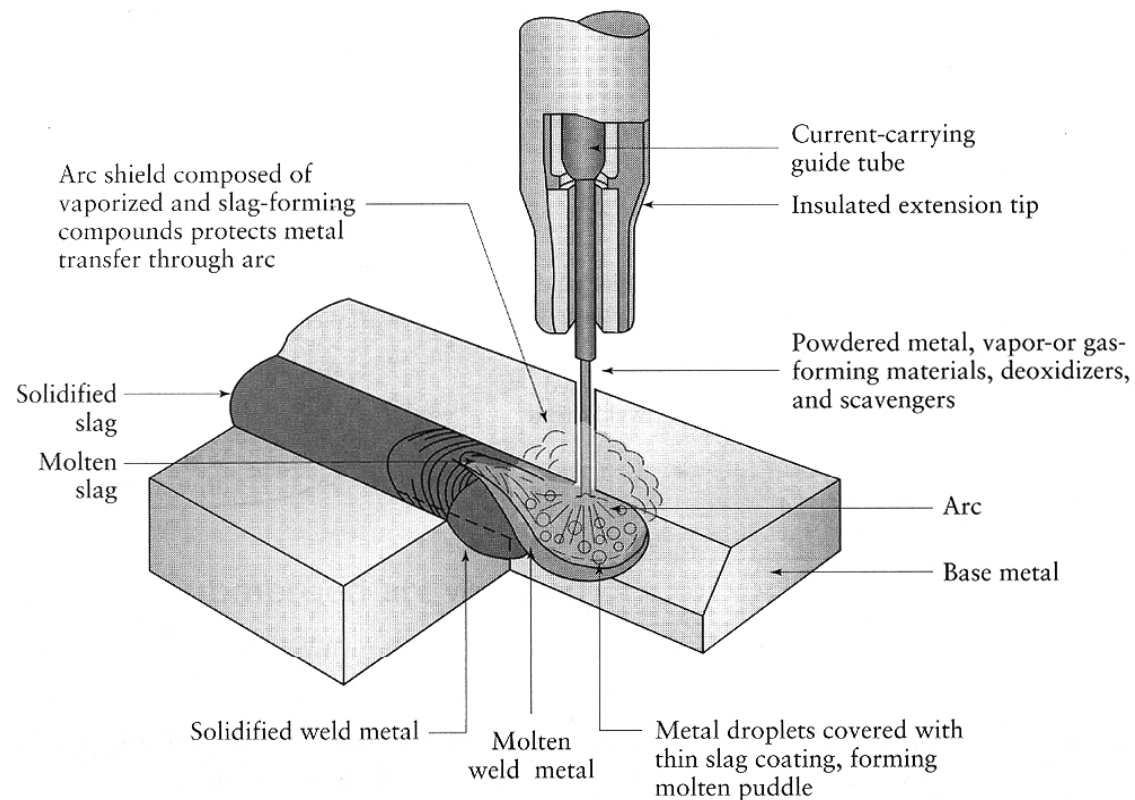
Schematic illustration of the flux-cored arc-welding process. This operation is similar to gas metal-arc welding, shown in Fig. 12.5.
